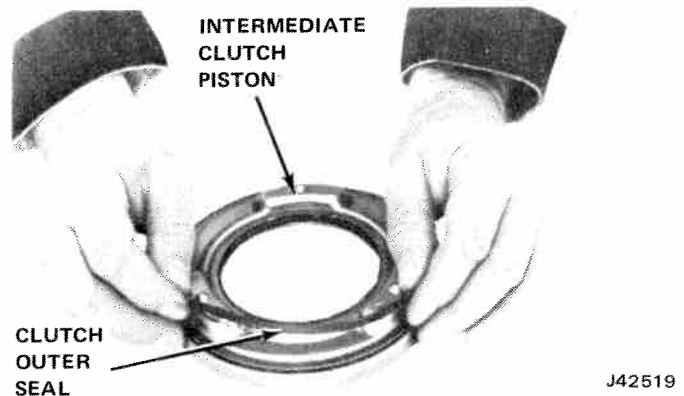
Installing Outer Seal on Intermediate Clutch Piston
